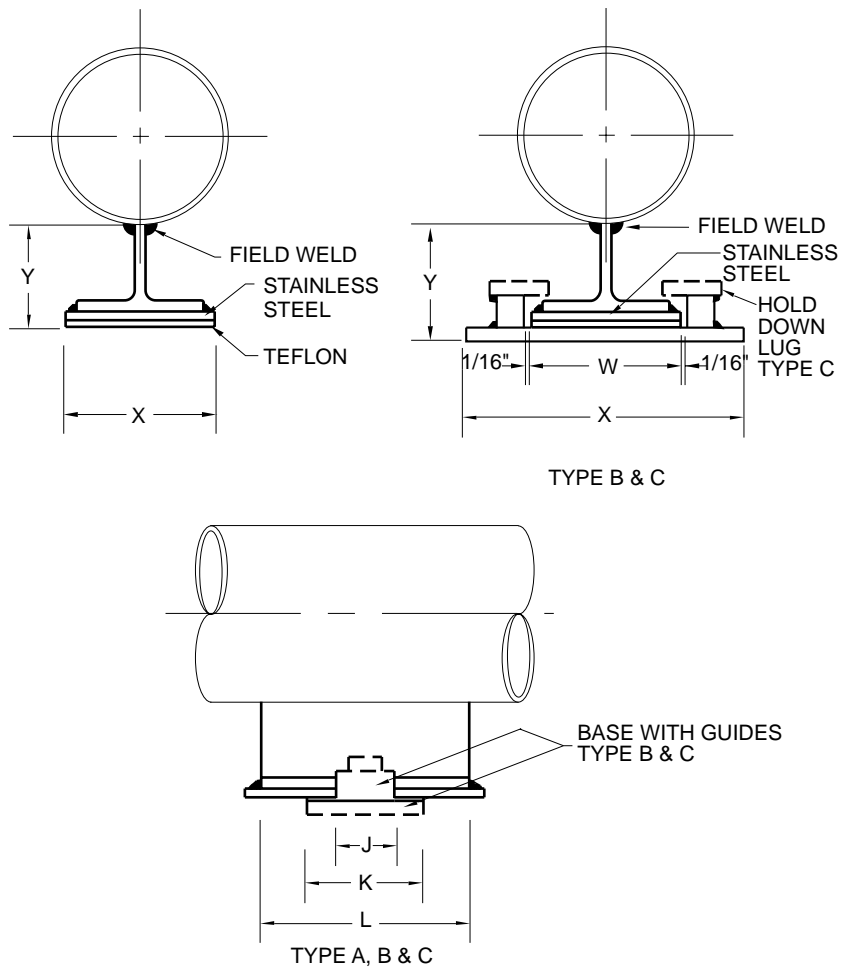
PIPE SLIDE ASSEMBLY
